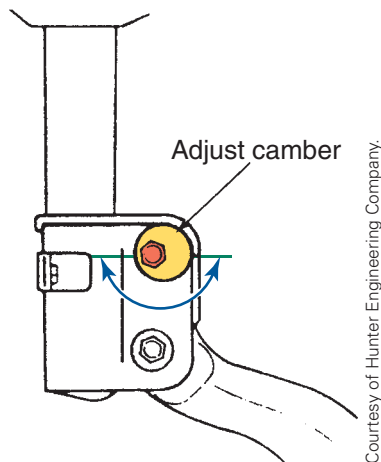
Some MacPherson suspensions use cam bolts at the connection to the steering knuckle for camber adjustments.
